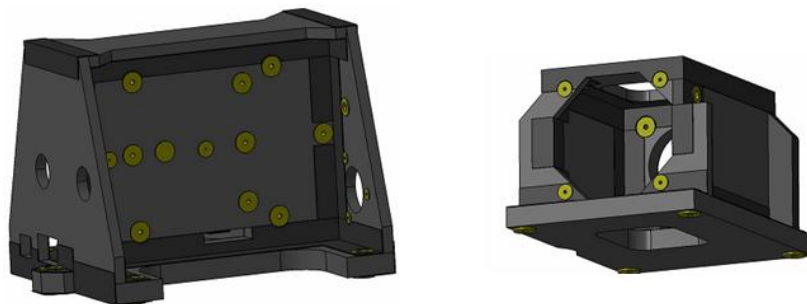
Sandwich panels structure for STC-VIHI (on the left) and HRIC (on the right)
